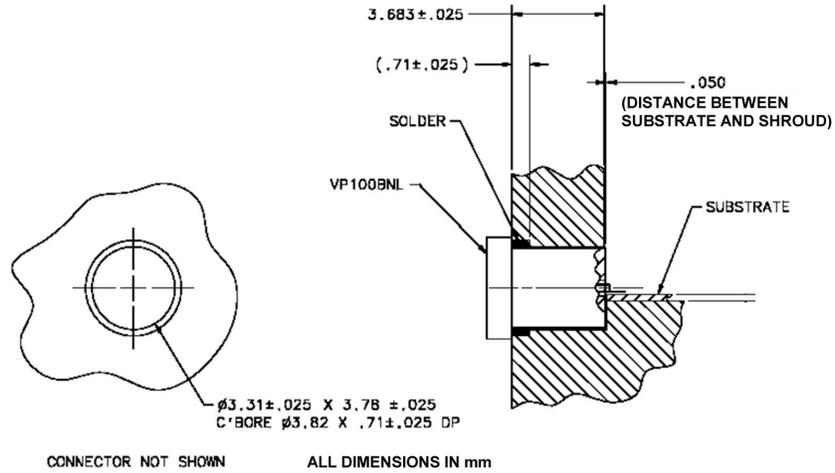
VP100BNL Mounting Hole Dimensions and Assembly Drawing for Thick-wall housing
